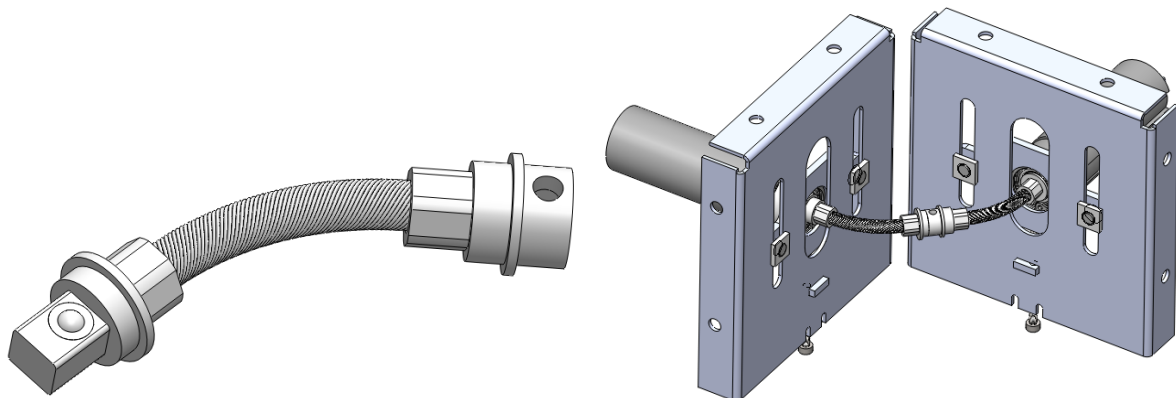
Flexible shaft as universal to transfer torque Figure 33. Connector idler 0-90deg
